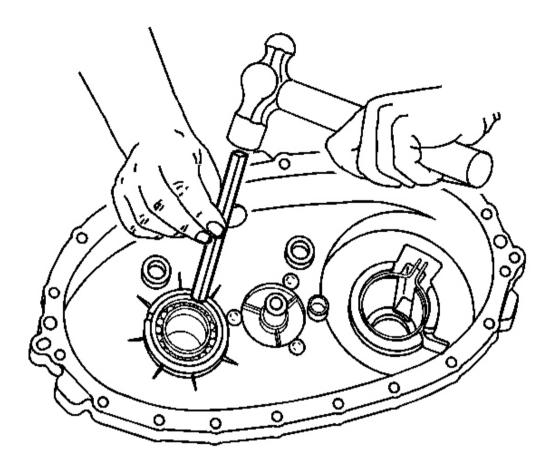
Installing Front Output Shaft Rear Bearing In Rear Case Half Courtesy of GENERAL MOTORS CORP.
